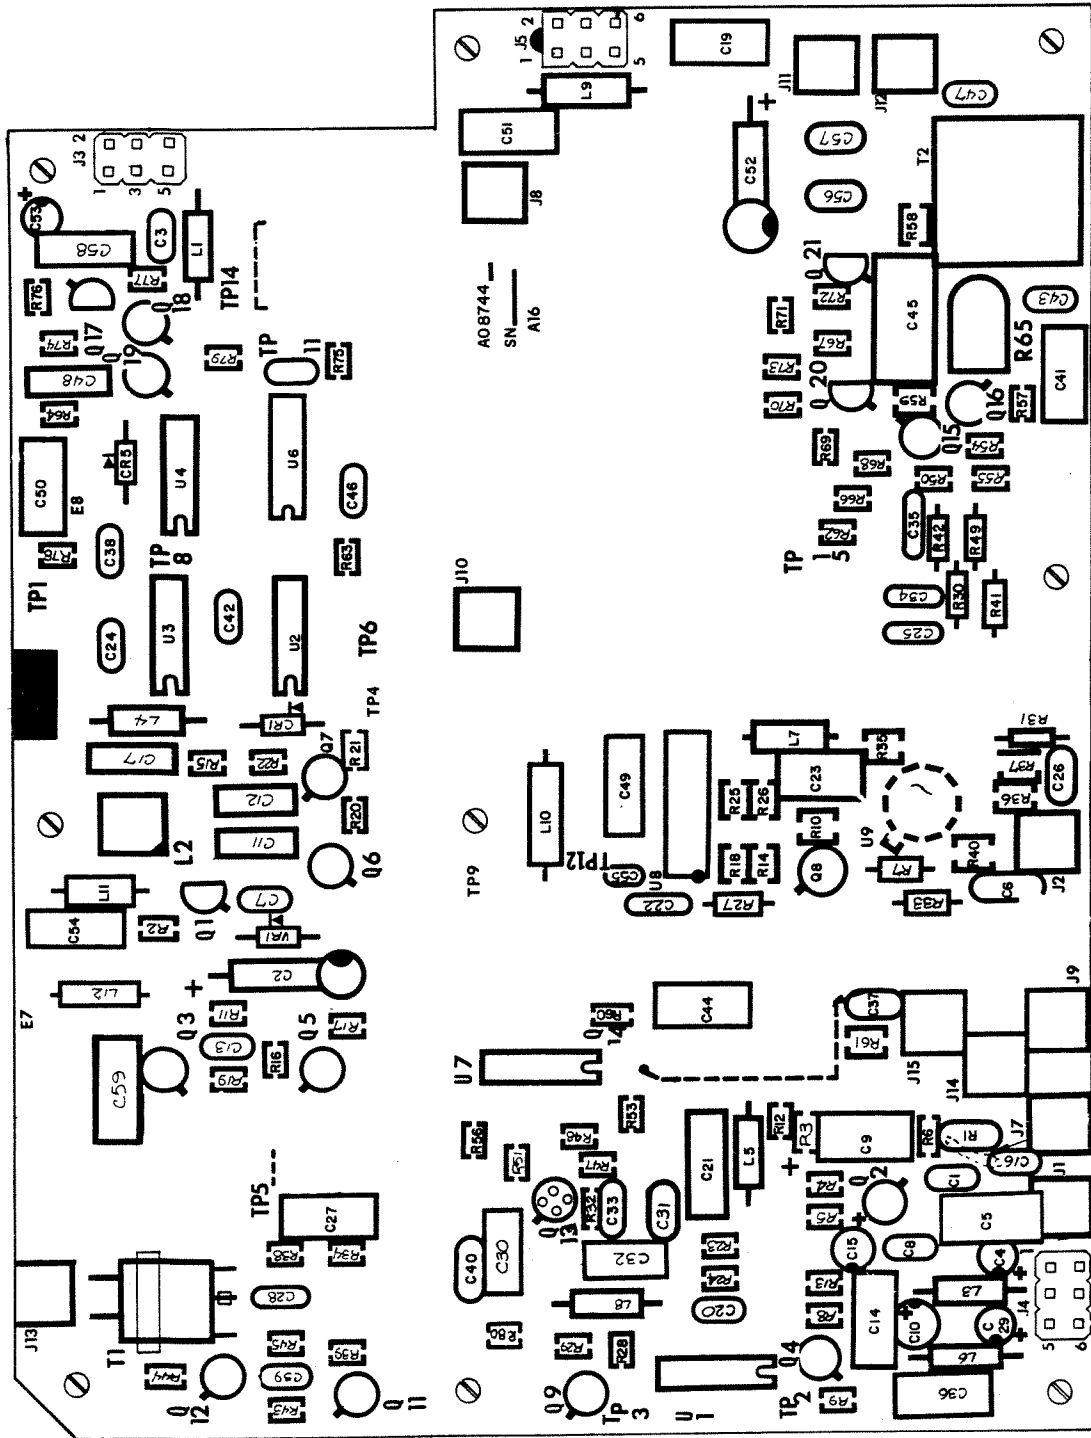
B. 34 MHz Generator A16, Circuit Card Assembly
